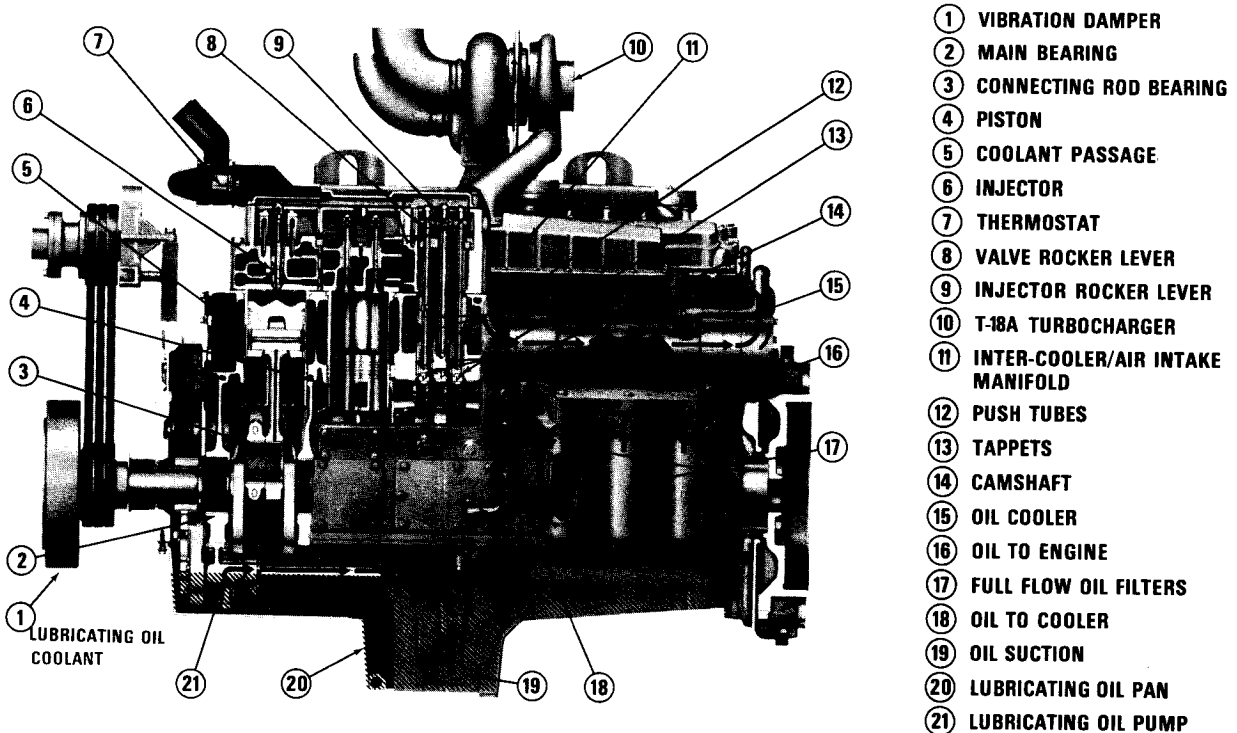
, (CWC-13). Lubricating oil and coolant flow — V-1710 Engine
